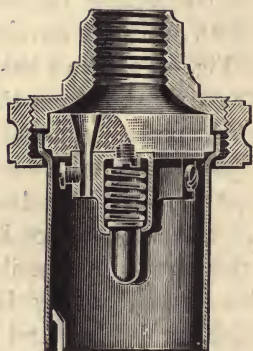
Section of Central Contact, Collar Lamp-Holder.
